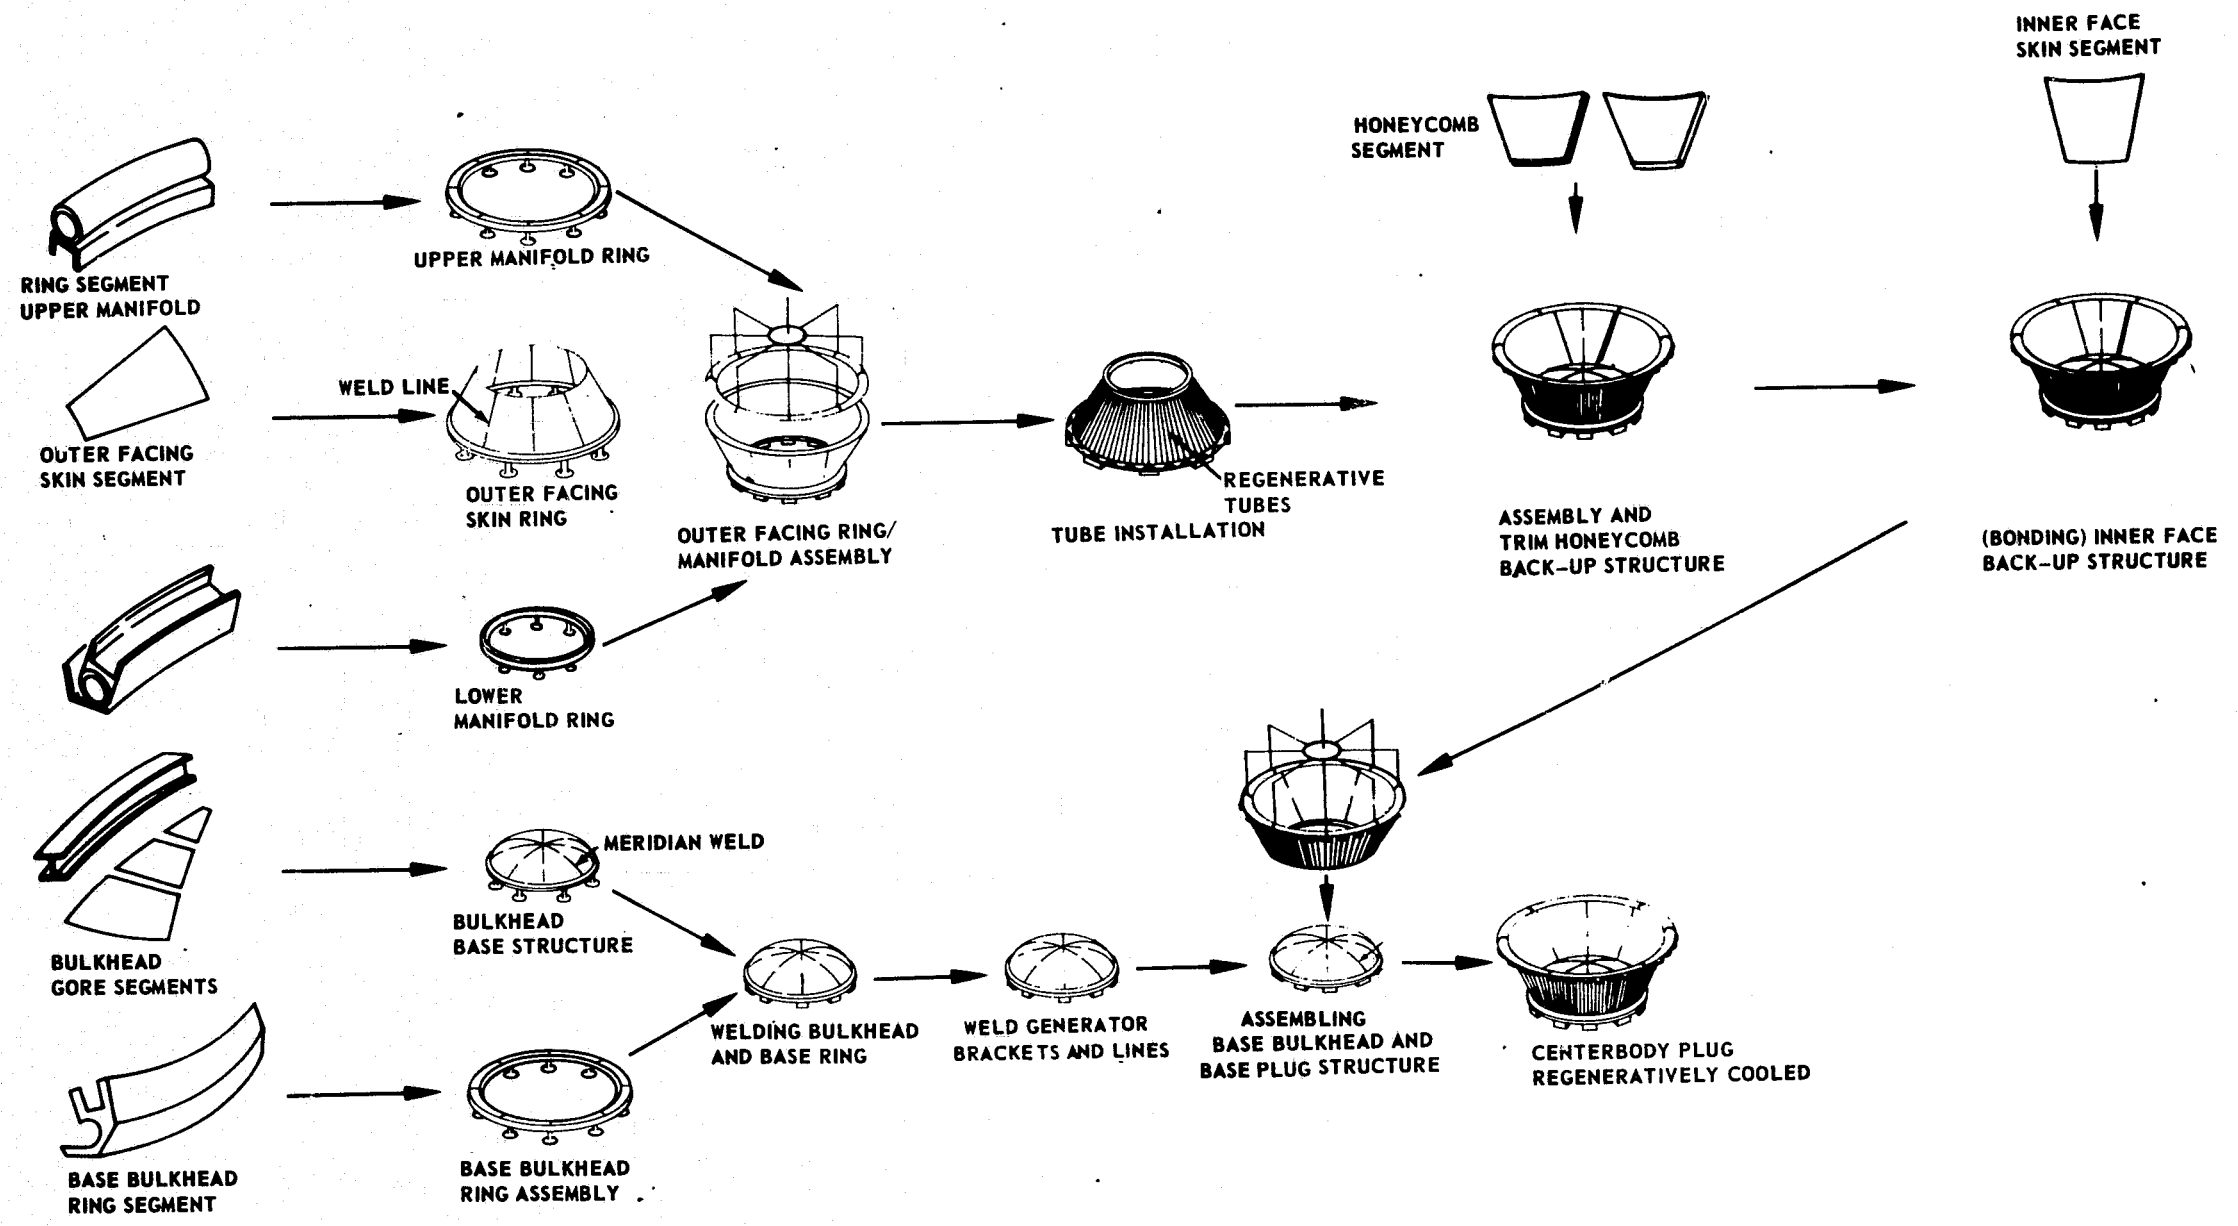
CENTERBODY PLUG ASSEMBLY SEQUENCE
